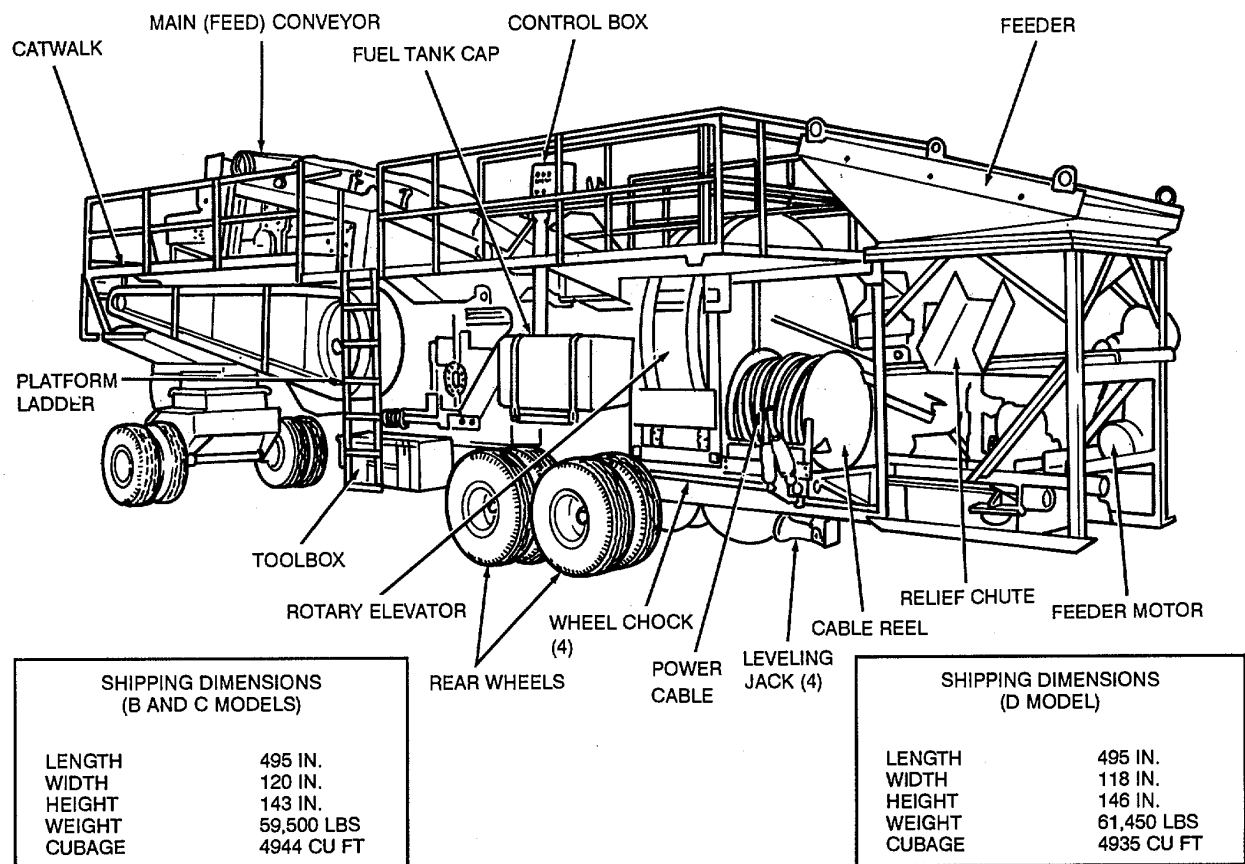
Roll crusher, left rear, three-quarter view (Model 523B, C).
